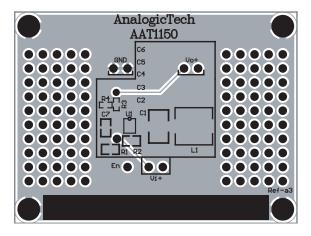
AAT1150 Evaluation Board PCB Bottom Side.
